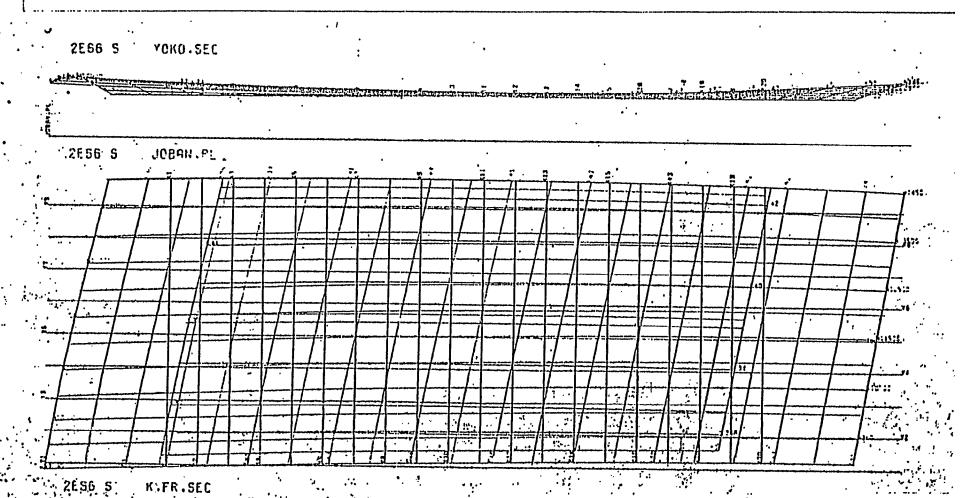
SECTIONL PLAN OF SUPPORTING JIG LINE
